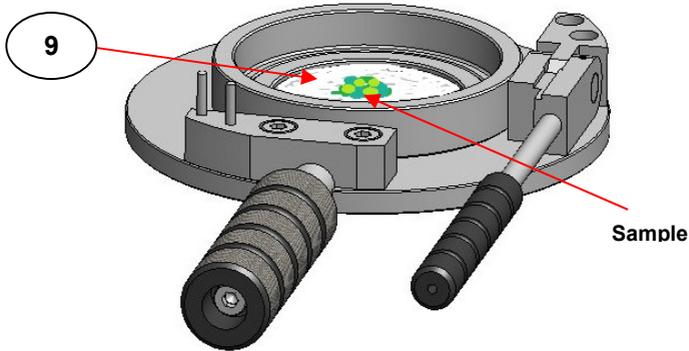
Lower Platen Pressing Assembly with Spacer Ring, Guide Ring, Lower Aluminium Foil and Sample
